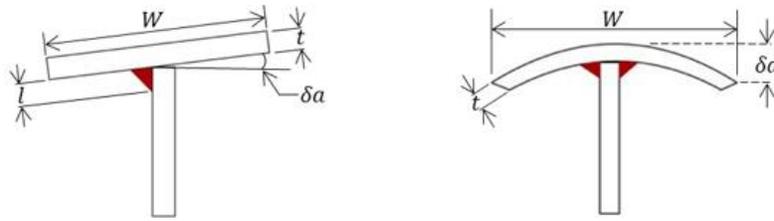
Angular Distortion at a T-joint with two fillets[20]
